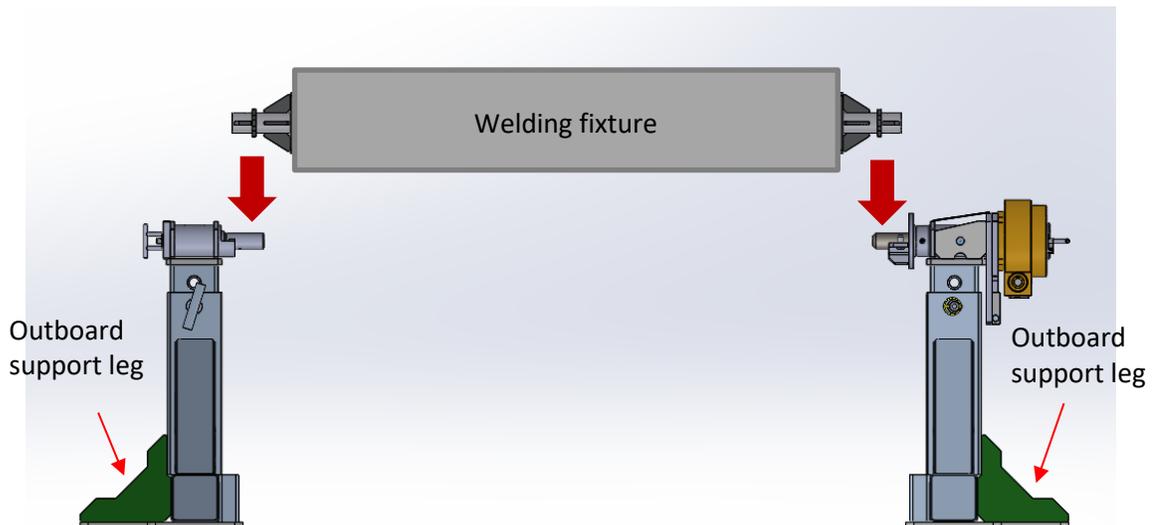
Illustration of Lowering Welding Fixture Vertically on A-Stands
